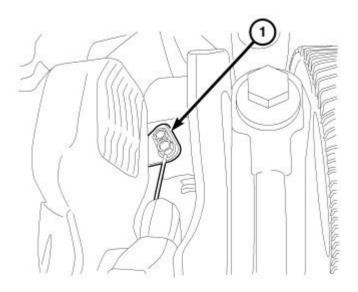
Balance Shaft Module Courtesy of CHRYSLER LLC
